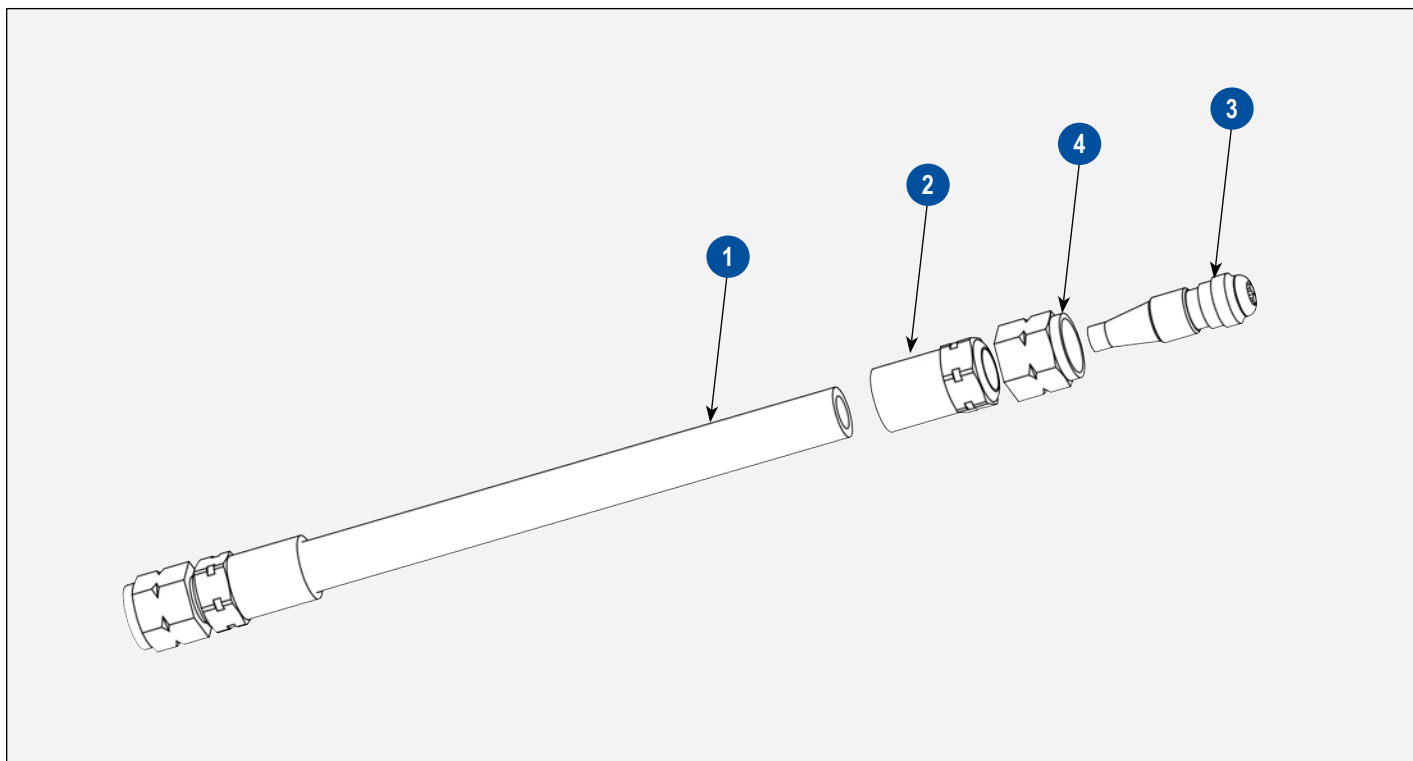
8340-XX Fluid Hose Parts and Assemblies
